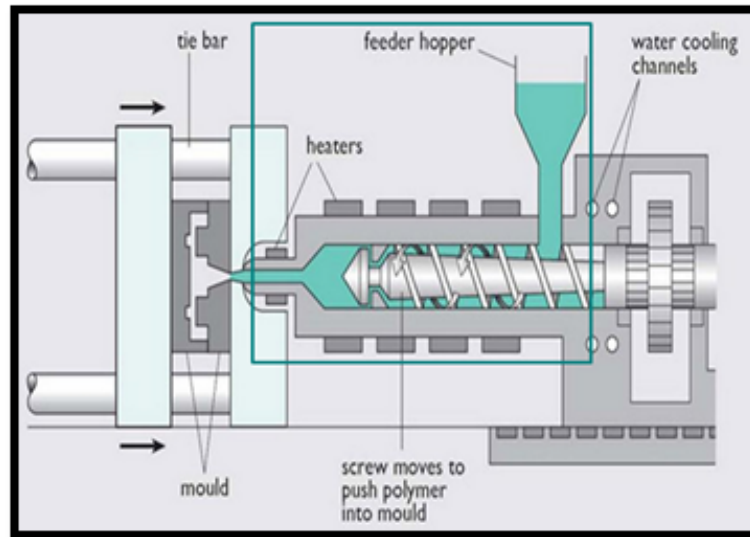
Figure B. Injection molding auger screw, modified from (Mushin, 2014)
